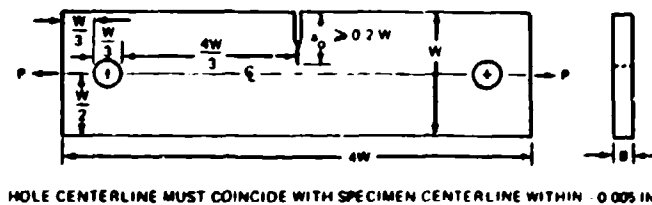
Single Edge Notch Tensile (SENT) Specimen.
